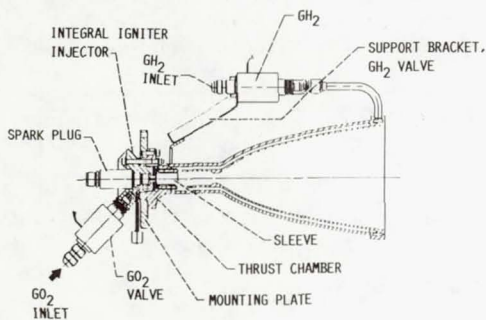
CUTAWAY VIEW OF THRUSTER ASSEMBLY.
